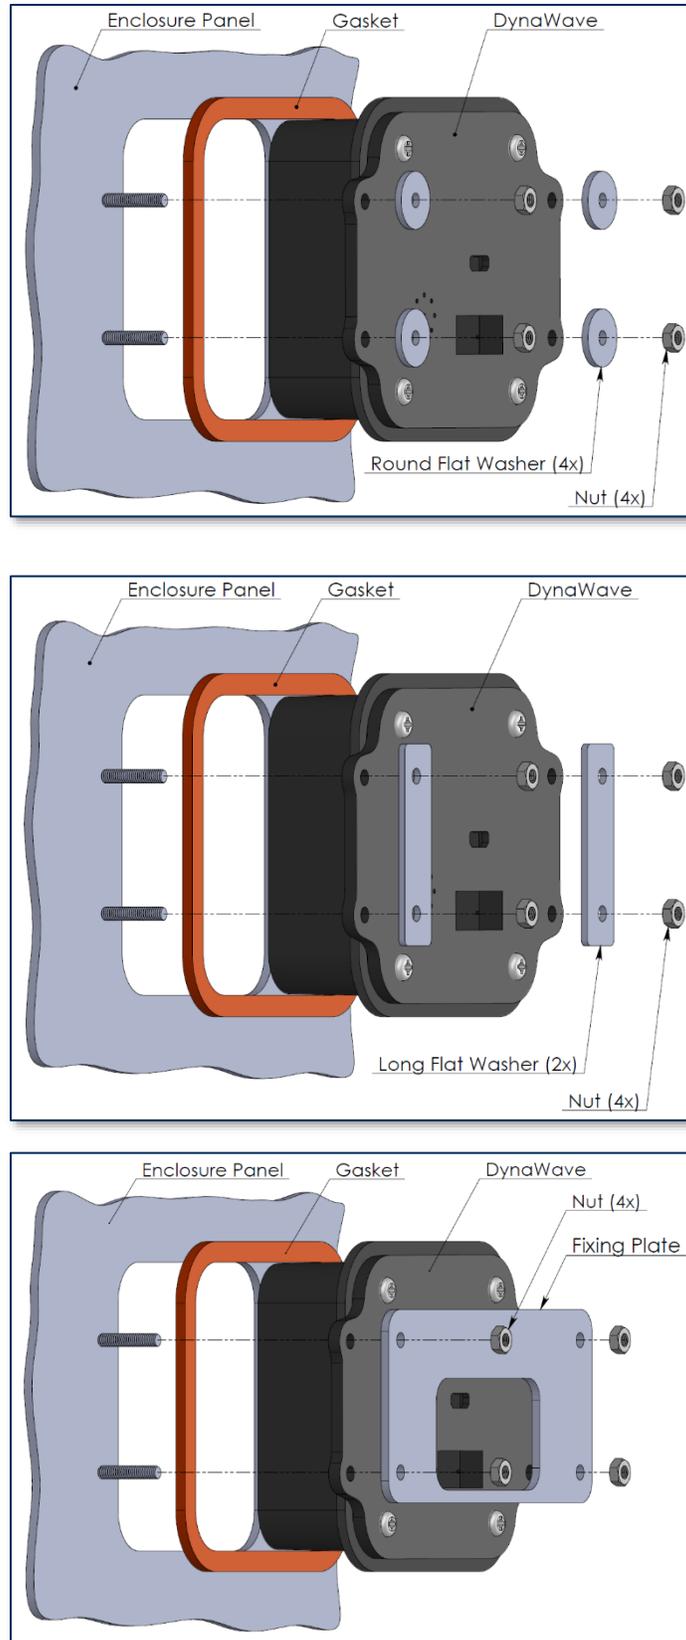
DynaWave Threaded Stud / Nut Mounting
